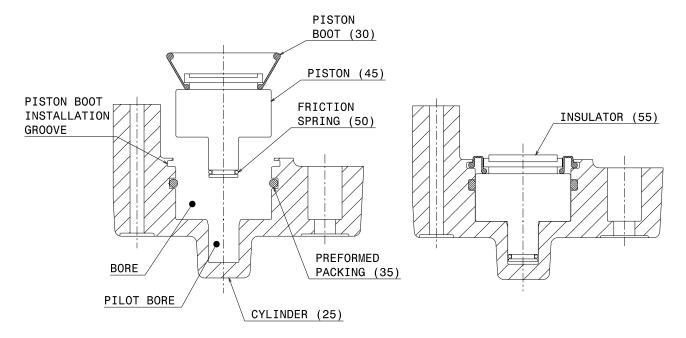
Install the Preformed Packings, Boots, Pistons, and Insulators
